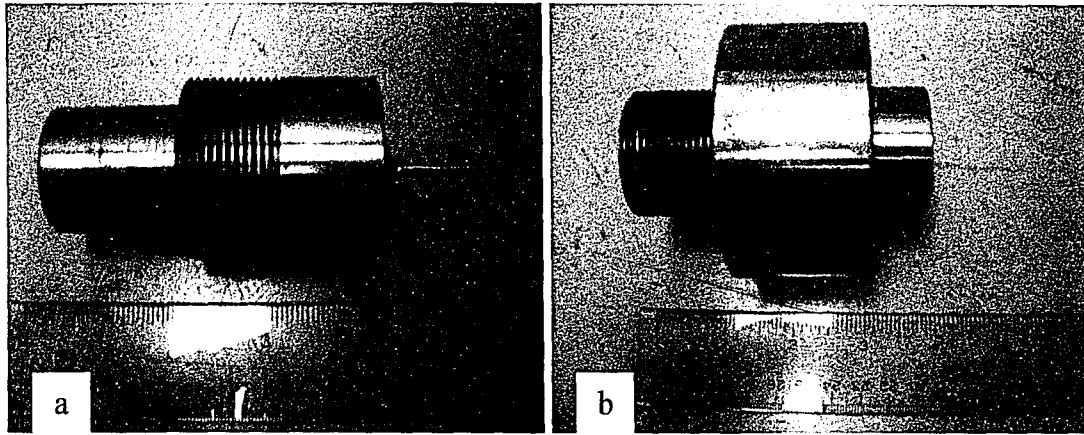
(a) Extrusion punch in punch holder. (b) Extrusion die in die holder.
